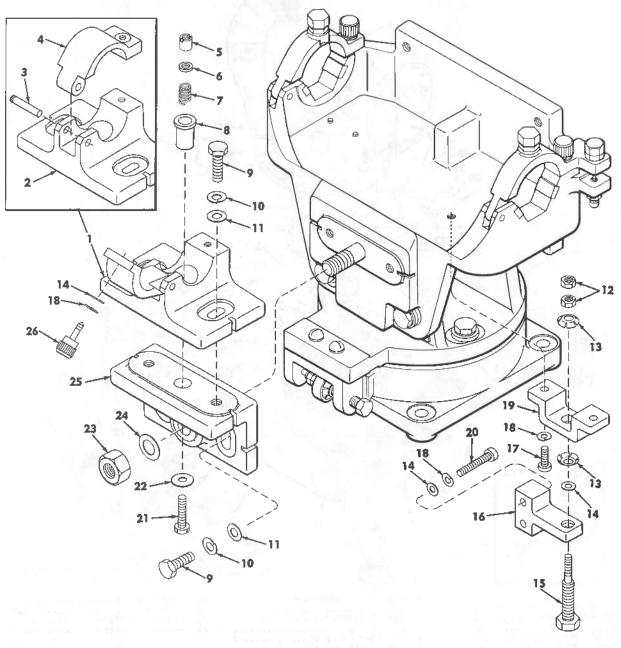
BASE, ANTENNA /9136028/-EXPLODED VIEW /SEE FIGURE 6 FOR NEXT HIGHER ASSEMBLY/
